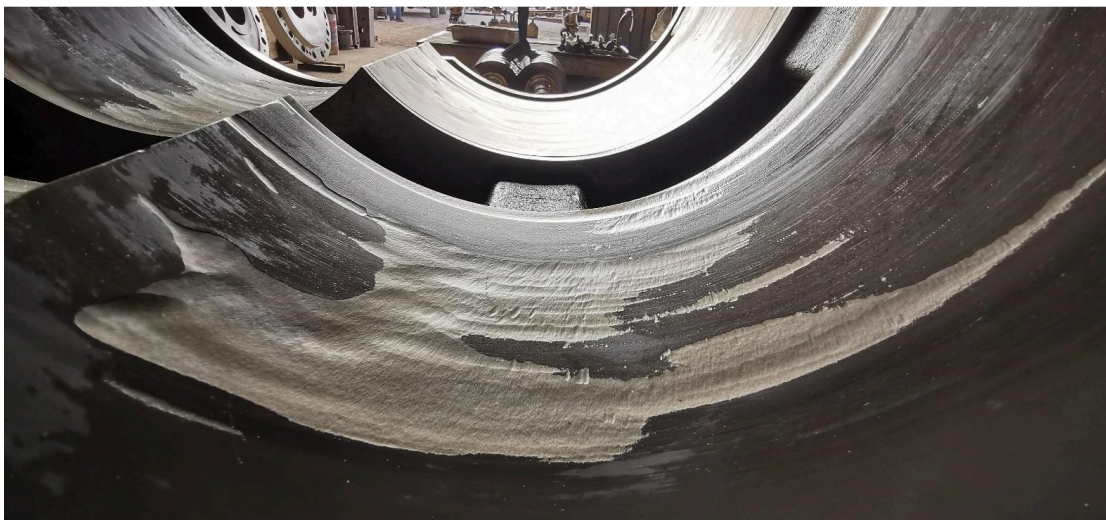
NDE (Non Drive End Bearing) (Driving shaft side).
